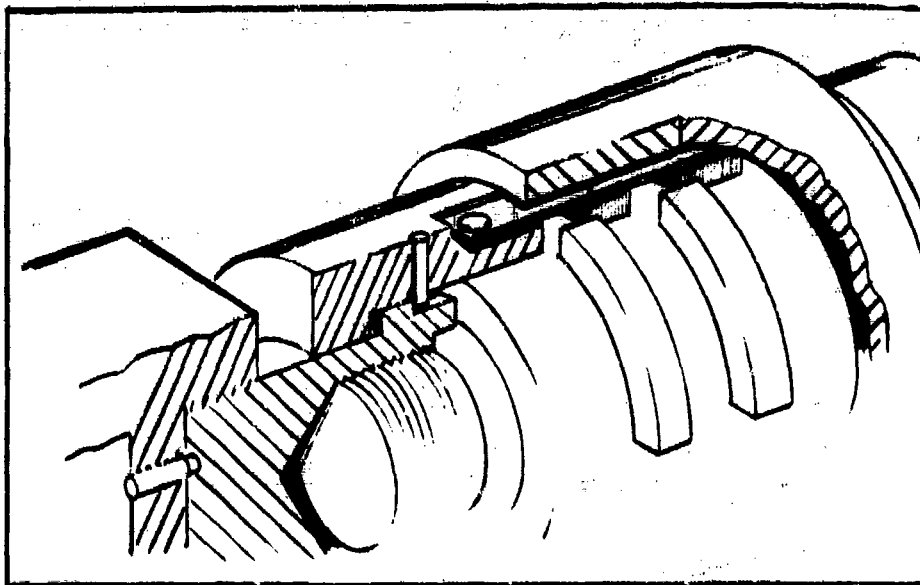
shows a cross-sectional view of the safety fitting. As can be seen from the drawing, it consists of seven major parts. Two of these are end connectors which connect the link in series with the system. Near the aft end an adapter provides the means of attaching the aft end connector to both the break link and the outer lock sleeve. The outer lock sleeve contains a guide groove and the female part of the locking lugs. The forward end connector attaches to the inner lock piece. This has a spiral cam groove (to provide rotation for locking) and the male locking lugs. It also has an internal shoulder that holds one end of the break link. The actuating sleeve fits over both the inner lock piece and the outer lock sleeve and has an attachment loop on the outside to connect a static line to the aircraft. It also contains a guide pin which fits into a straight groove on the outer lock sleeve and a camming pin which rides in a cam groove in the inner lock piece. First motion of the load causes the static line to move the actuating sleeve forward and the cam to rotate the locking lugs into engagement.
